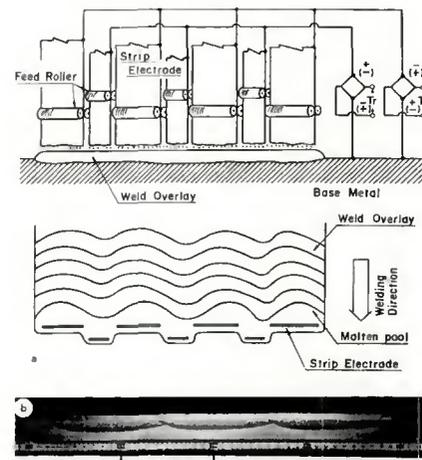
(a) Principle of weld surfacing process by multiple strip electrodes; (b) macrostructure of surfacing weld by multiple strip electrodes (Ref. 3)
